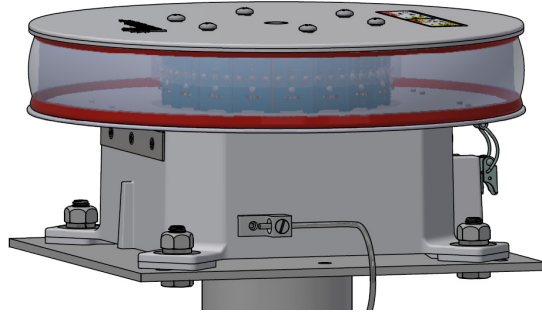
IFH-1900-01R Flash Head Dimensions and Mounting Detail
